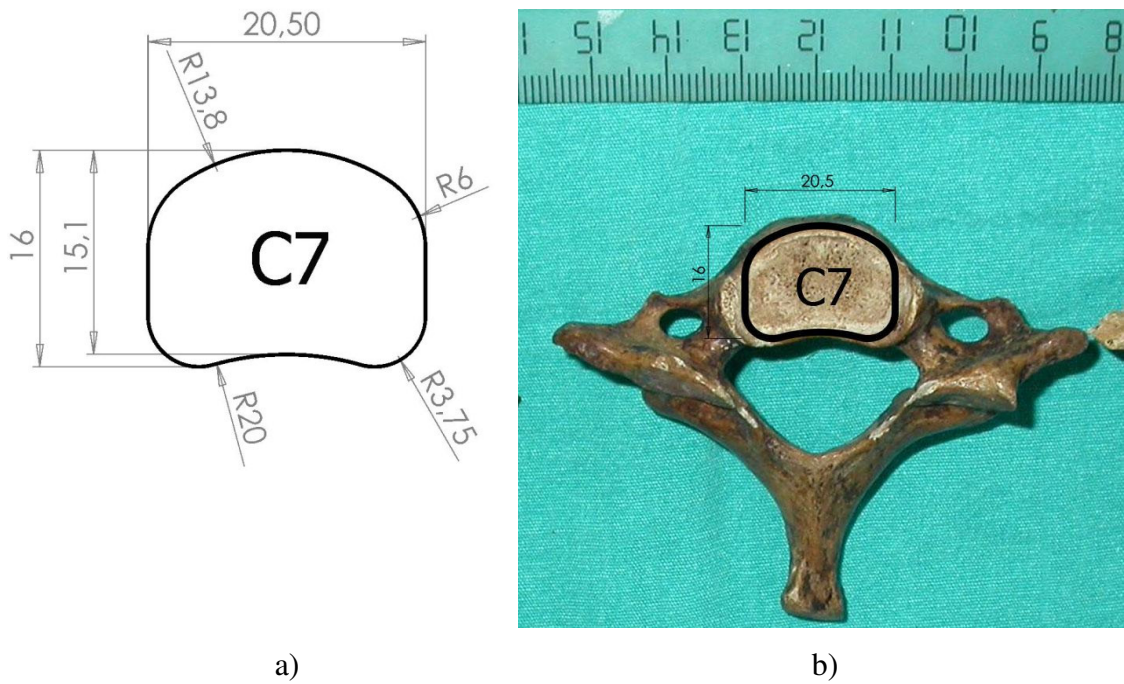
a) Defined sketch of C7 spinal cage and b) verification of dimensions.
